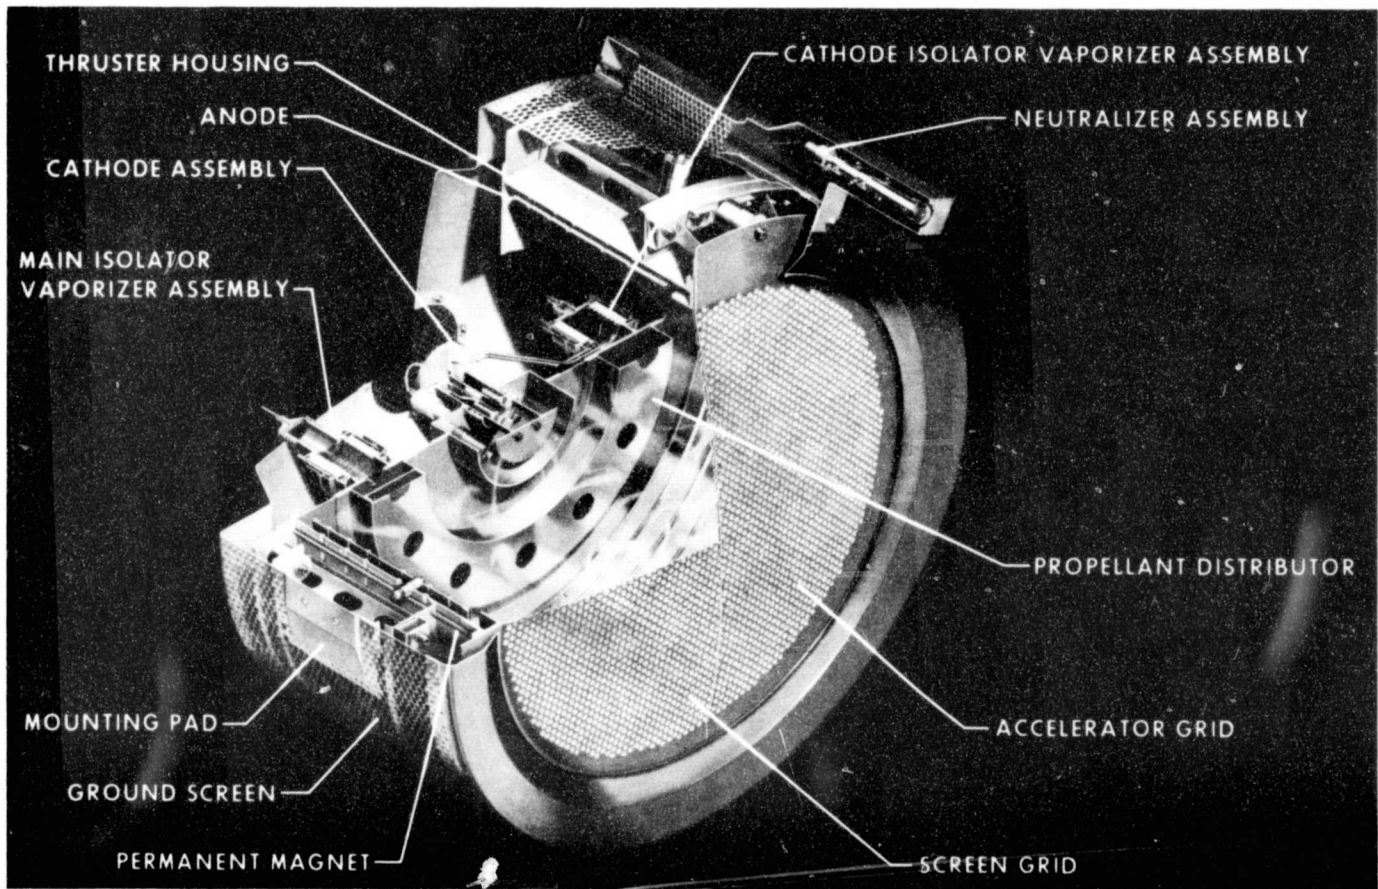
Cutaway View of Ion Drive Rocket Engine
